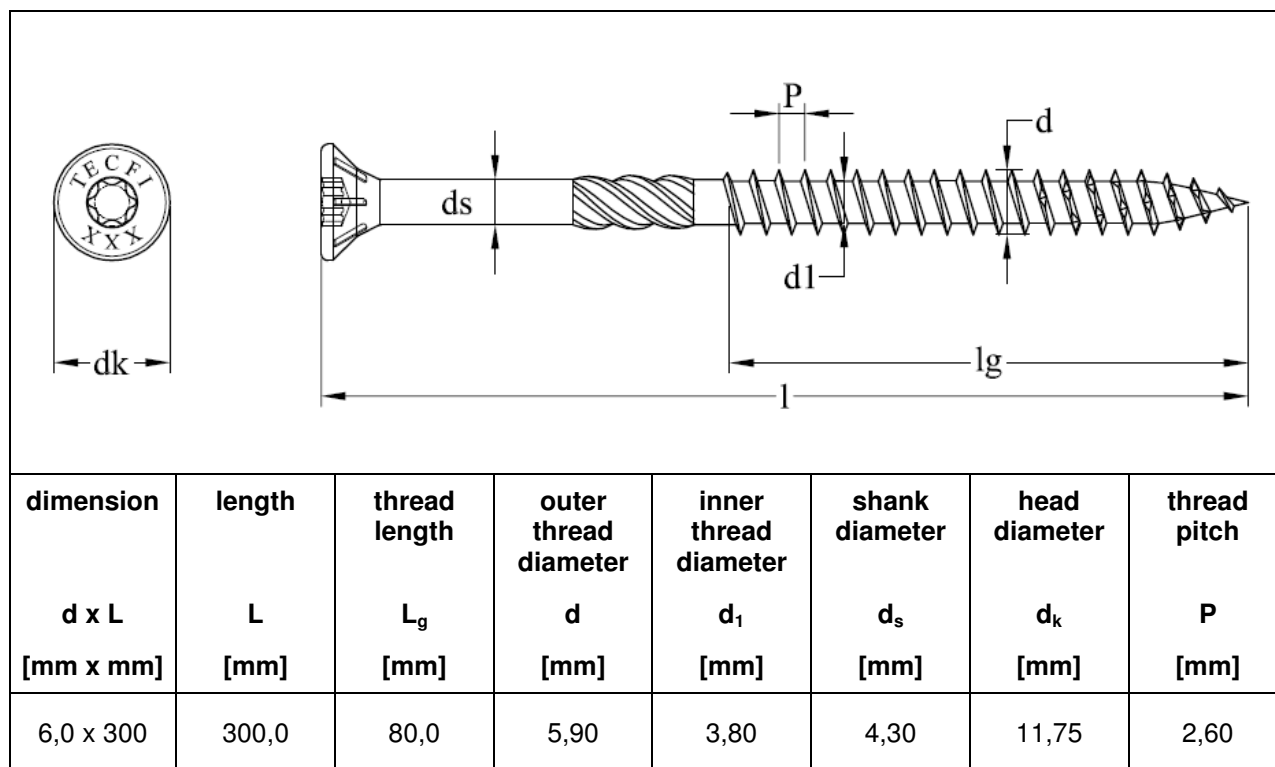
Shape and dimension of self-tapping screws type „TT02“ with countersunk head and partial thread made of carbon steel; tested dimension: d x L = 6,0 x 300 mm
